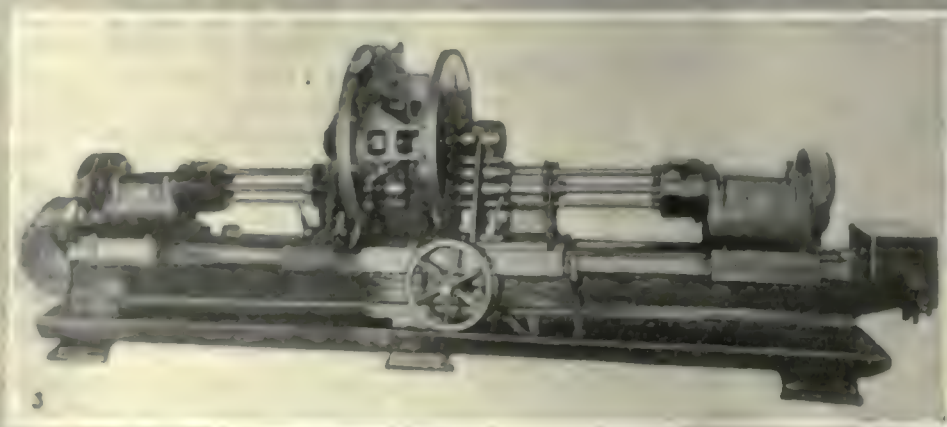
Hooper special machine drilling and reaming transmission cases. Tolerances 0.0005 in. on essential dimensions. Production time 6 min from floor to floor.
